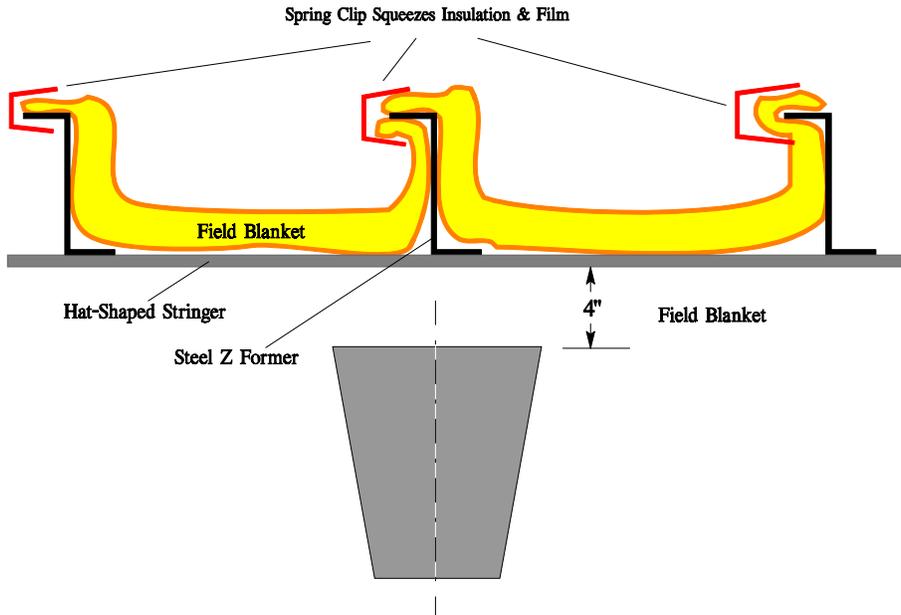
IMPROVED INSULATION BLANKET TEST SPECIMEN ATTACHMENT METHOD
